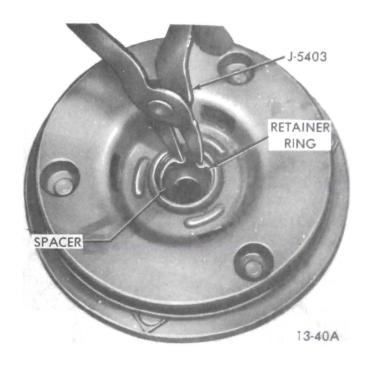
Removing or Installing Retainer Ring in Clutch Drive Plate
